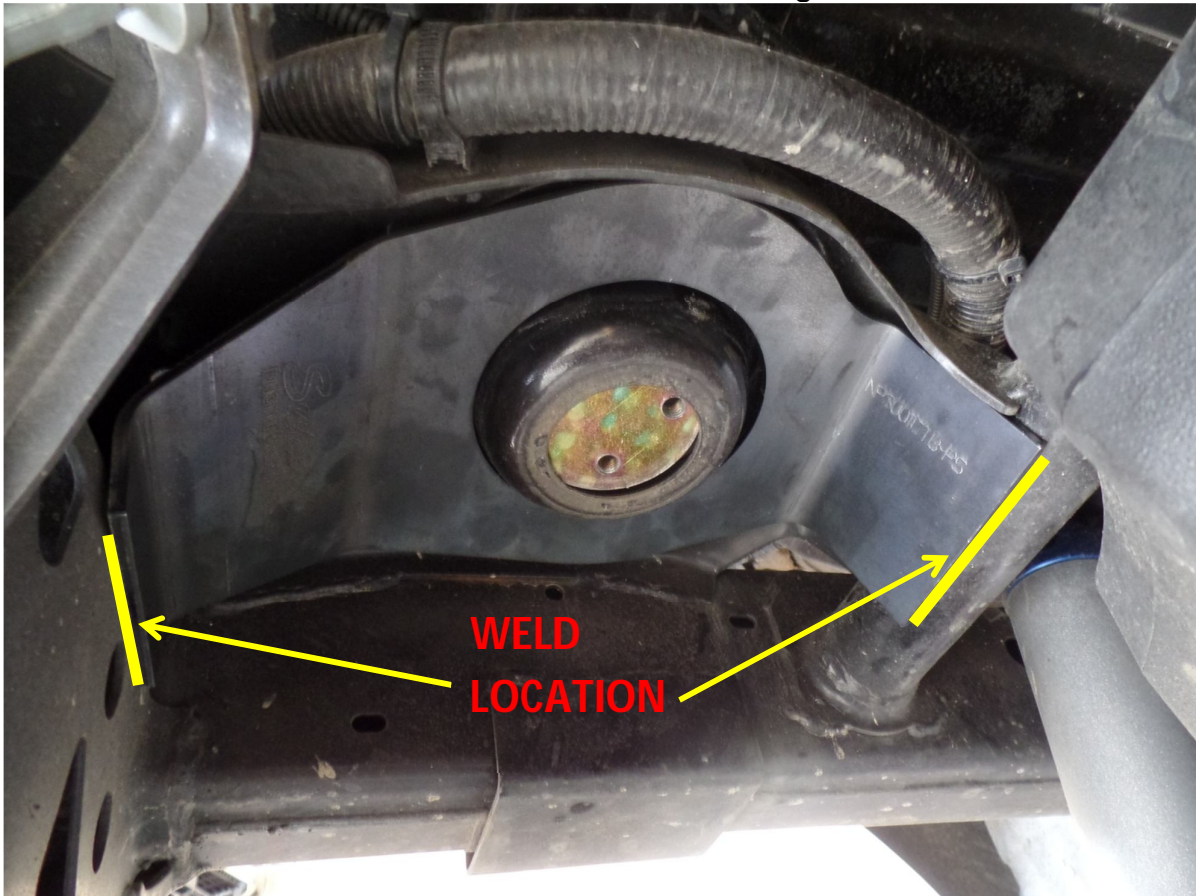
Correctly Fitted Chassis Brace - Driver Side
